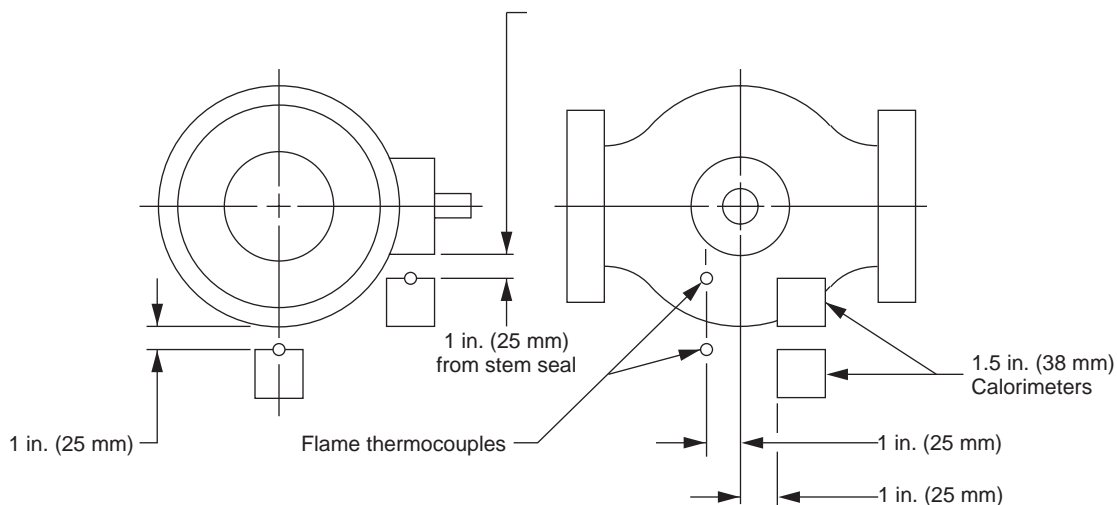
Location of Calorimeters Smaller Valves (Reference 2.2)
